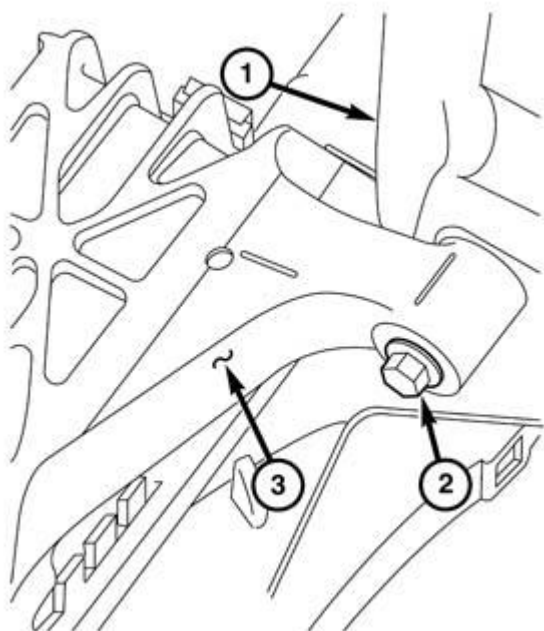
Coolant Tube Bracket Bolt, Transaxle Bracket Bolts & Frame Rail Bolts
